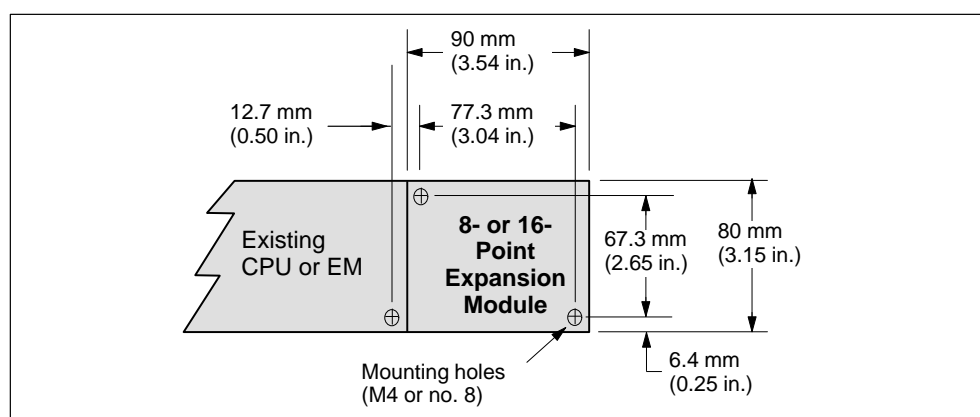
Mounting Dimensions for an 8- or 16-Point Expansion Module
